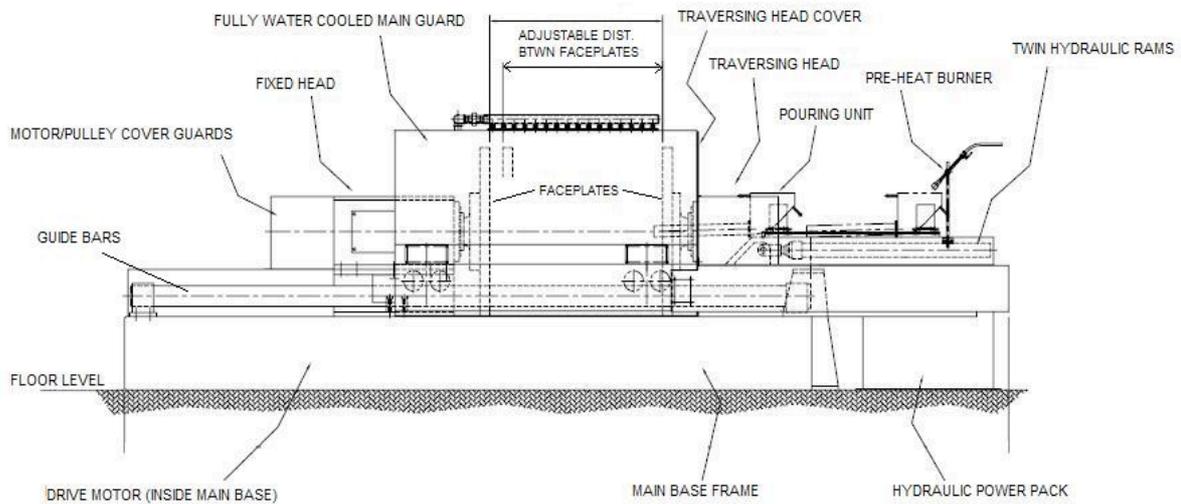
Dual face-plate centrifugal casting machine / Babbitt lining machine
